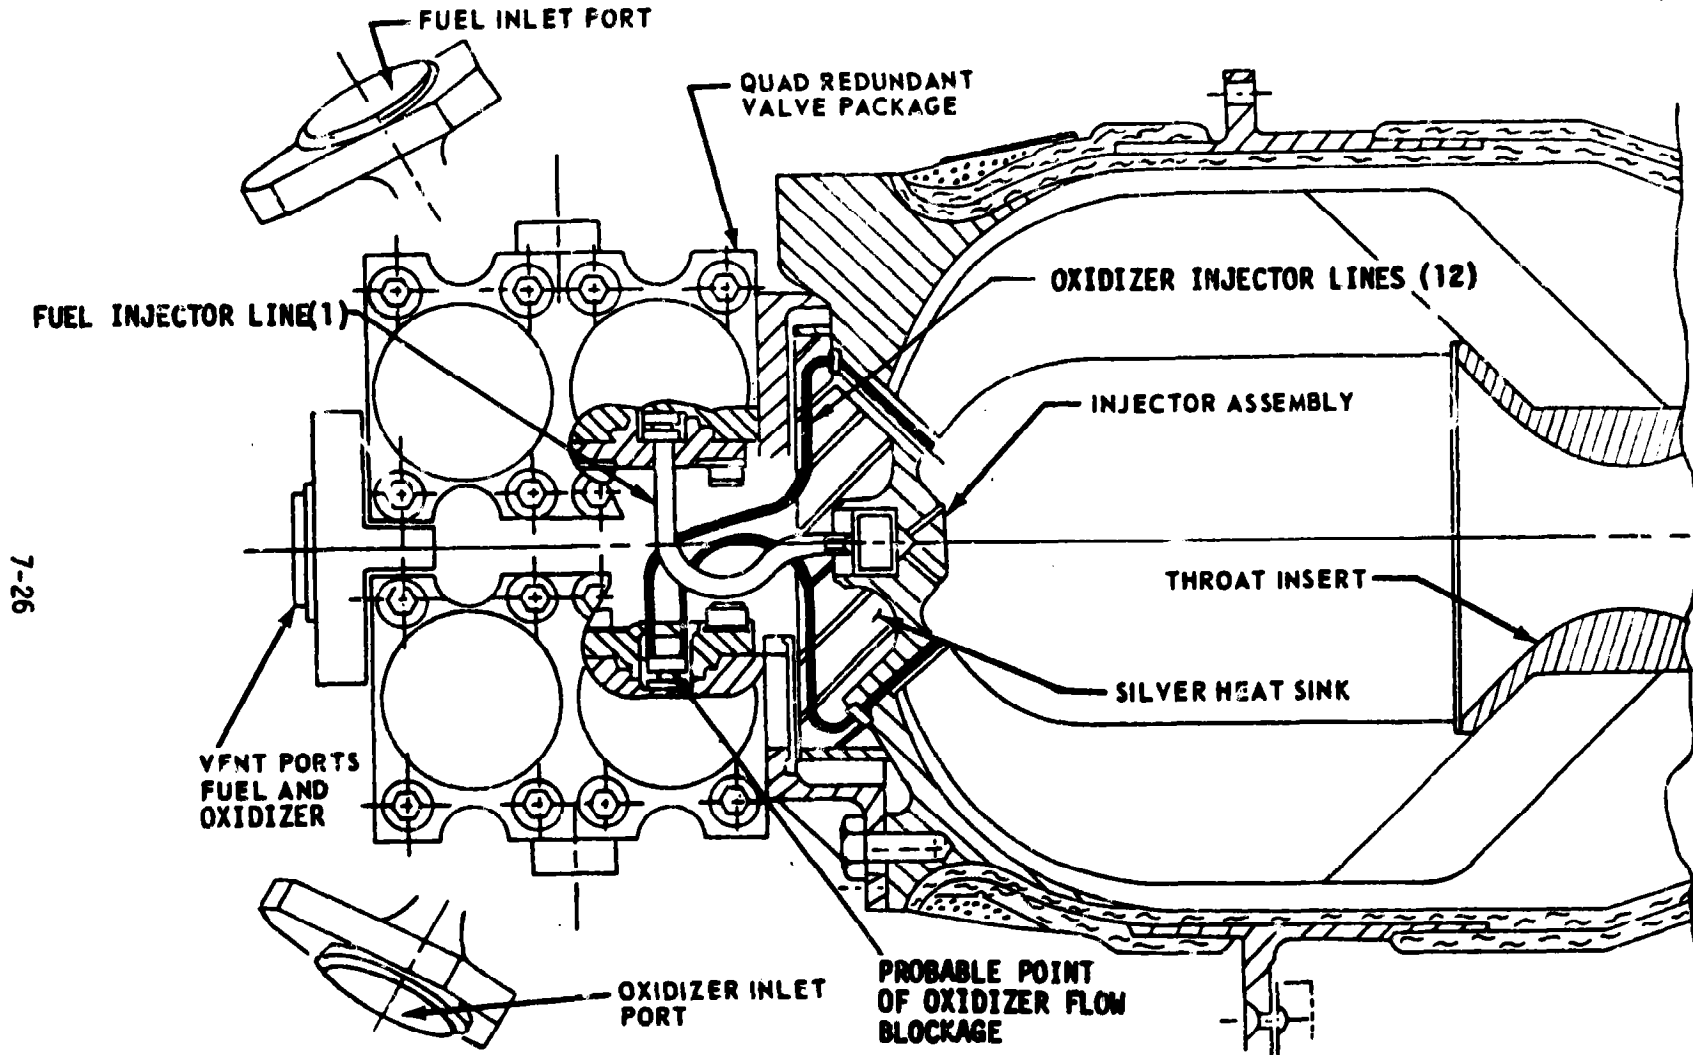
S-IVB APS Valve, Injector, Thrust Chamber Assembly
